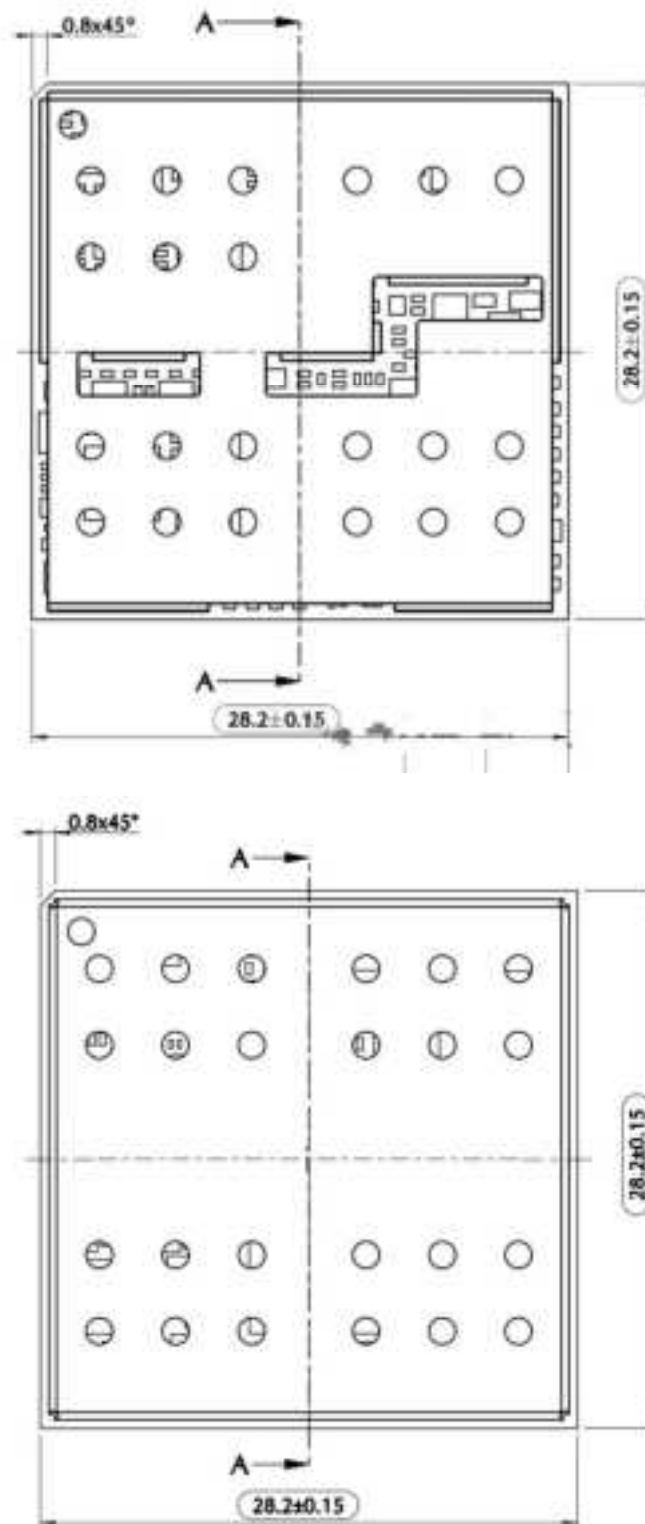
LE910Cx Mechanical Dimensions (Top view) with two kinds of shield design except for LE910Cx-WWX
